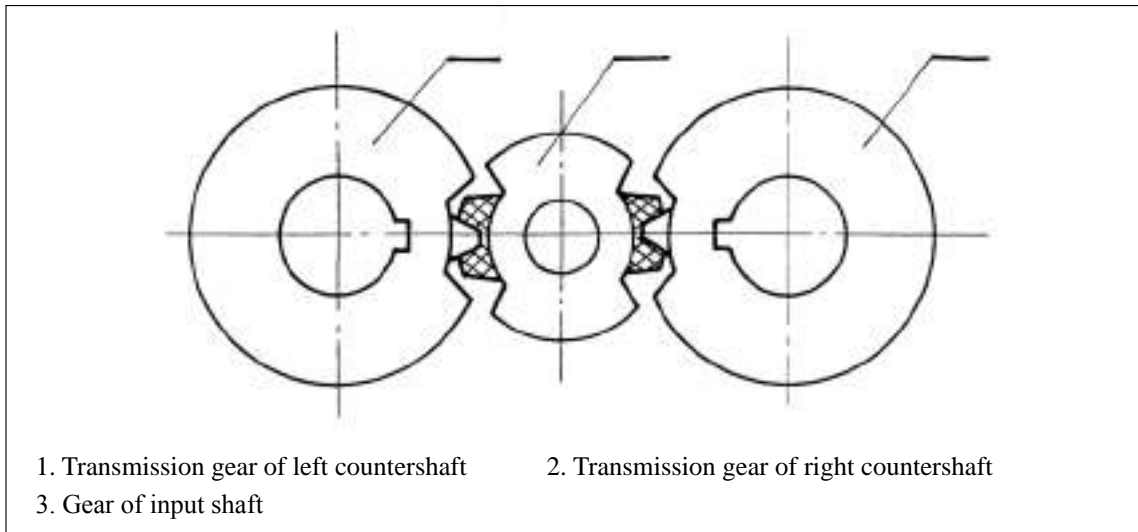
Layout of Matching Gear for Assembling Transmission Assembly
